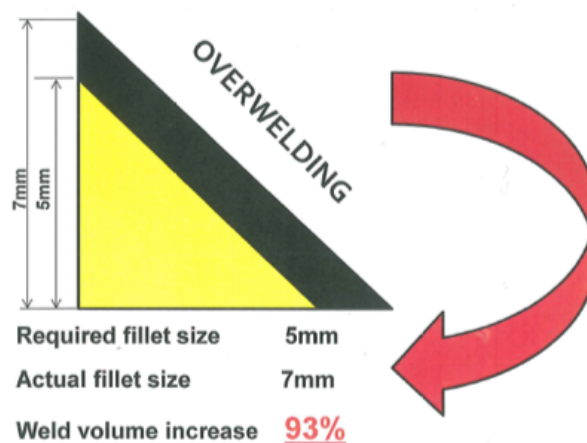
Design throat and actual throat thickness. Adapted from *The Welding Institute* [7].
